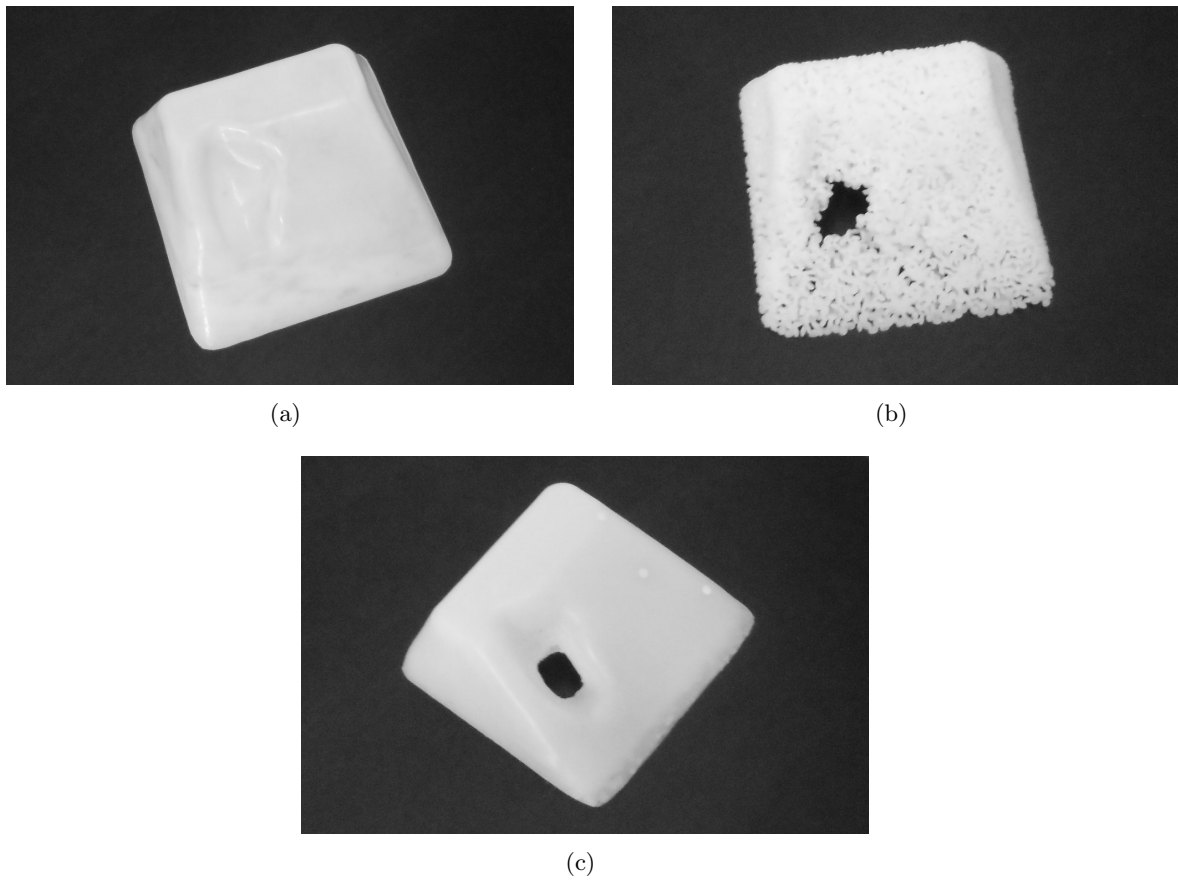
Rotational moulding parts manufactured by: (a) rotocast PU resin, (b) rotomoulded LDPE pellets, (c) rotomoulded LDPE powder
